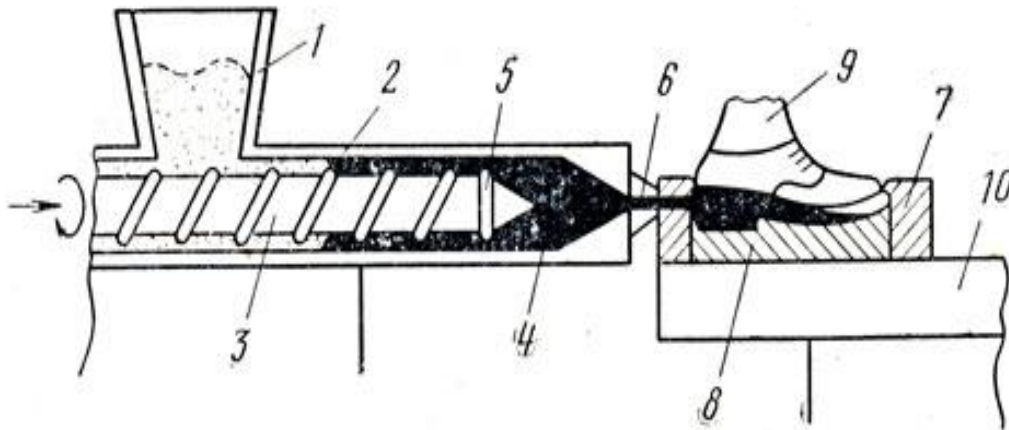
Scheme of the injection unit of the worm-piston machine: 1 - hopper; 2 - a working cylinder; 3 - a worm; 4 - polymer; 5 - check valve; 6 - gating channel; 7 - matrix; 8 - a punch; 9 - block; 10 - rotary table
